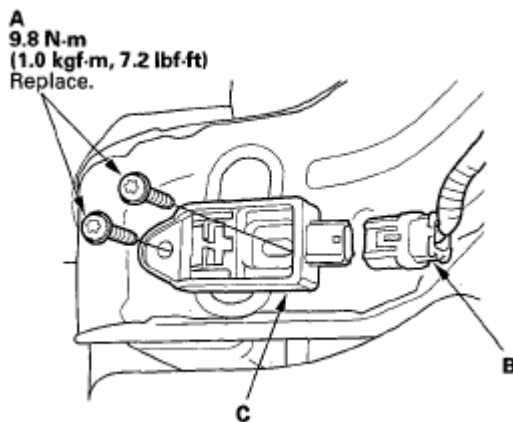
Identifying Engine Compartment Front Impact Sensor, 2P Connector And NEW Fasteners With Torque Specifications
